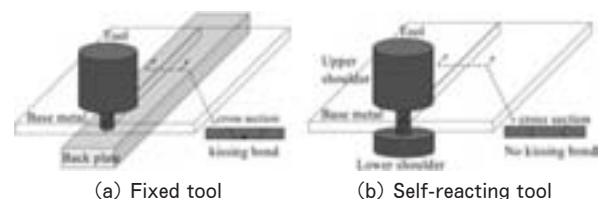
Schematic view of FSW by (a) Fixed tool and (b) self-reacting tool.
